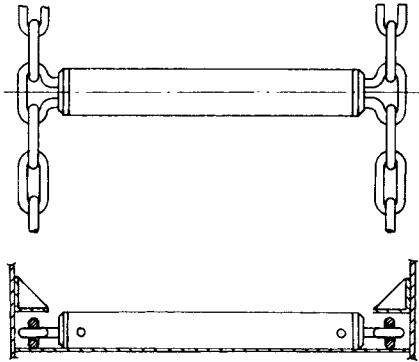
Scraper flight using parallel welded chains.
